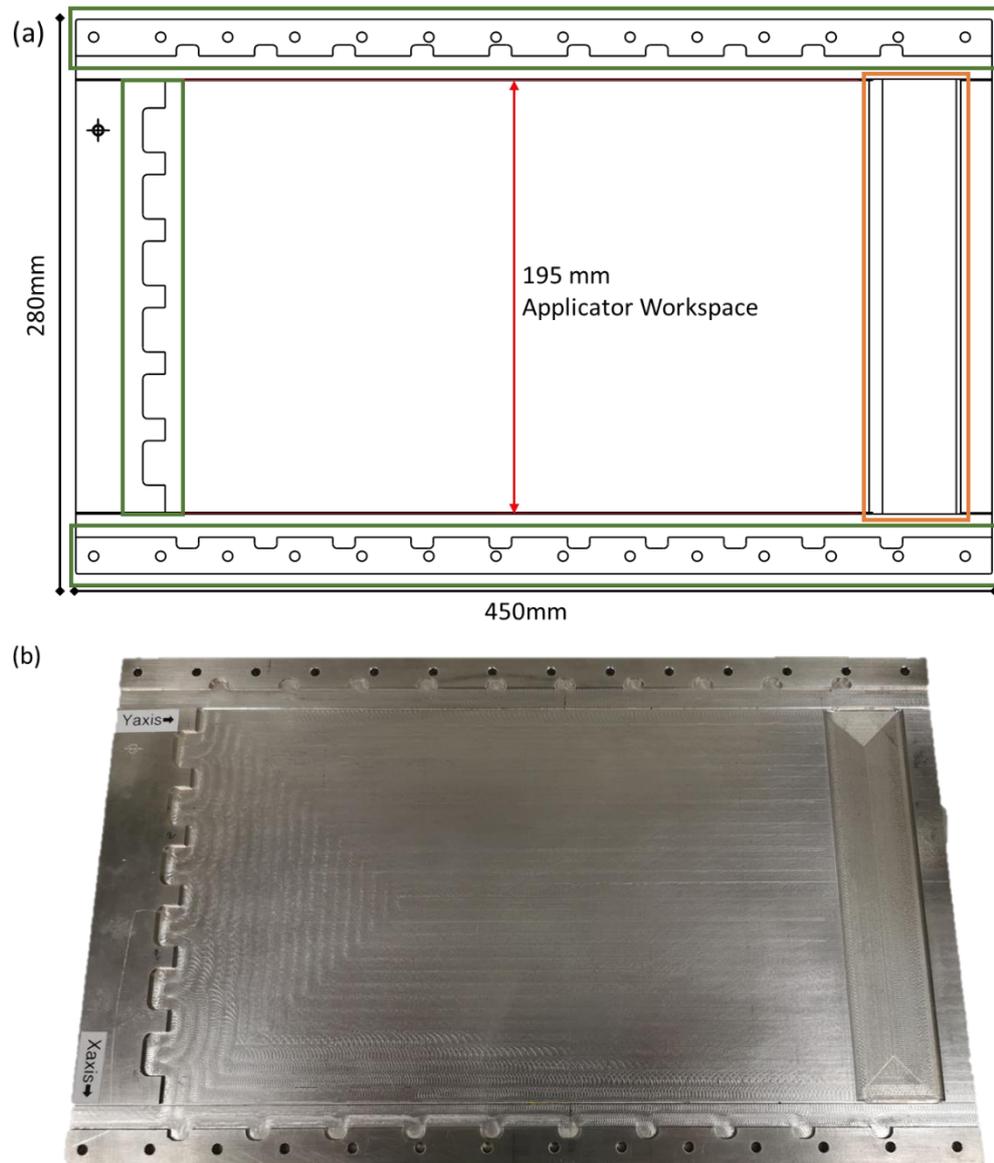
(a) Graphical illustration of designed SPIC build plate; (b) Machined build plate for SPIC fabrication (Width: 280 mm, Length: 450 mm, Thickness: 4mm). Ridges are formed on the side of the build plate to be used as alignment features (Green Box). A drain feature is incorporated into the design to remove excess elastomers during fabrication (Orange Box).
